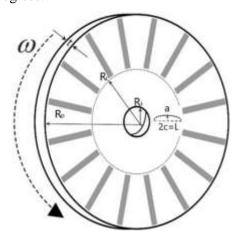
Schematic figure of a radial crack in a grooved rotating disc
